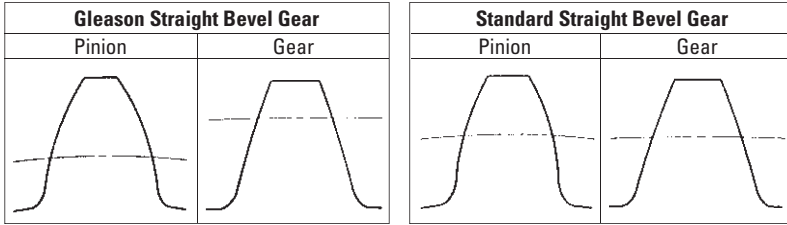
The Tooth Profile of Straight Bevel Gears
